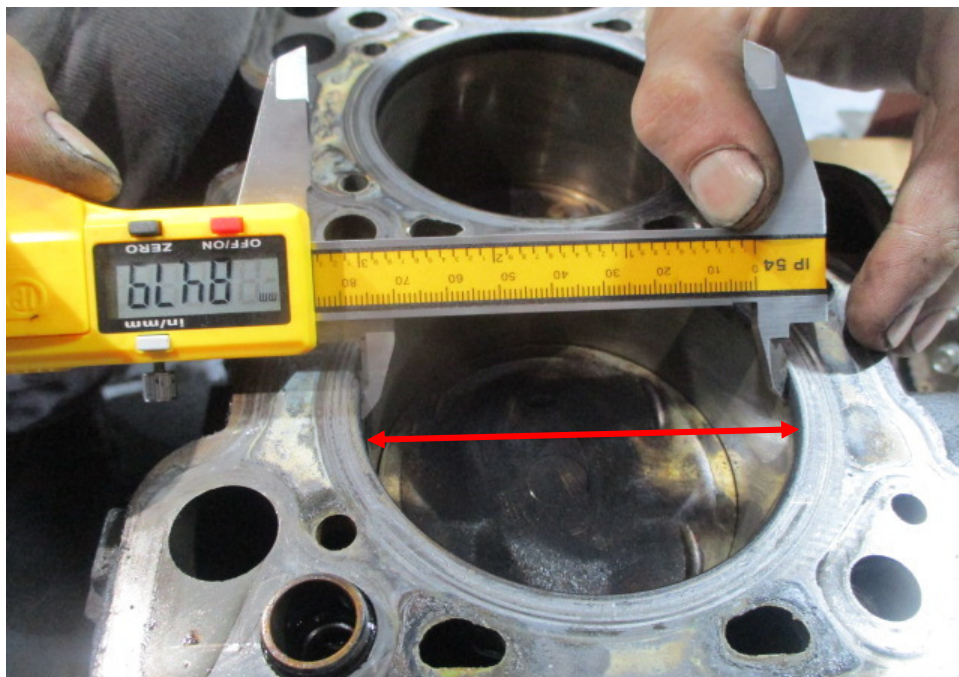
shows measurement being carried out to the bore (arrowed) of cylinder 4 of the Mitsubishi engine. The bore measurement of cylinder 4 was recorded to be 84.79mm.
